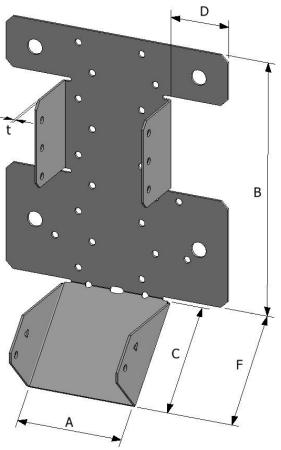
Dimensioned drawings for optional version SPR-Bxx/yyy
